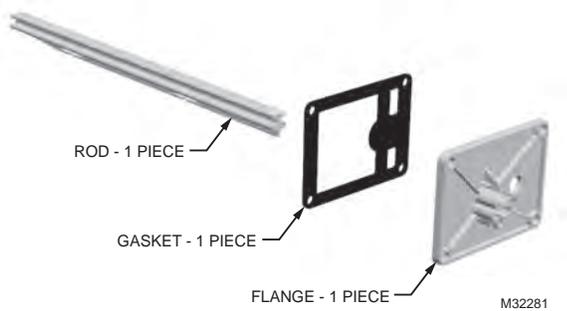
Duct Mounting Kit (Part No. 50053060-001).
